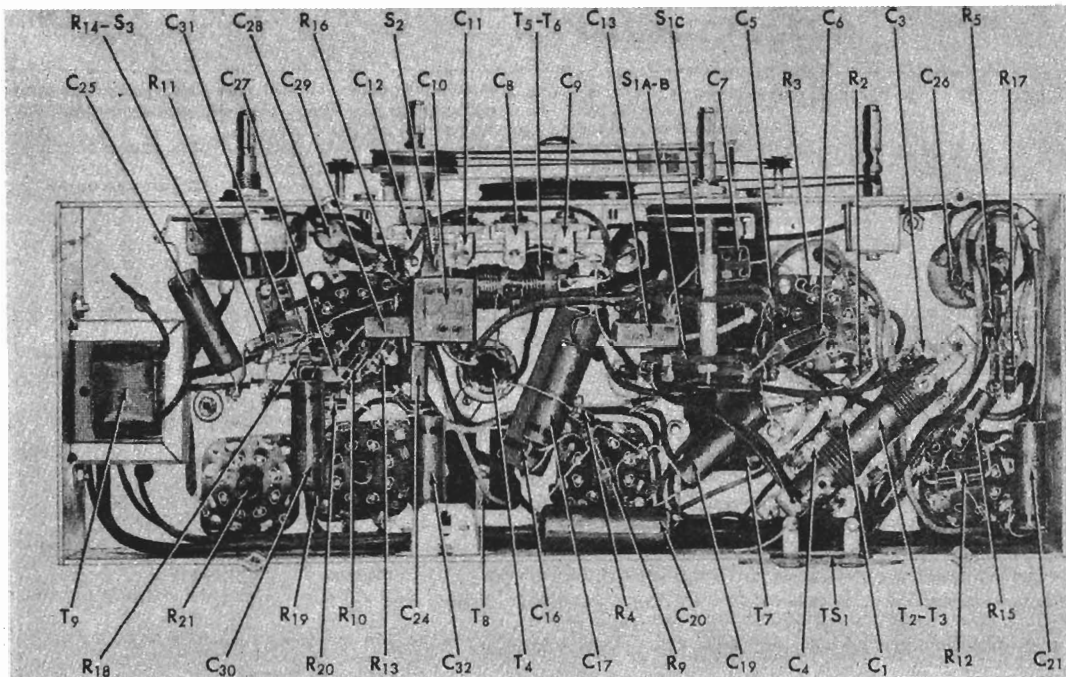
Models EX-102 and EX-103 bottom view of chassis showing location of component parts.
